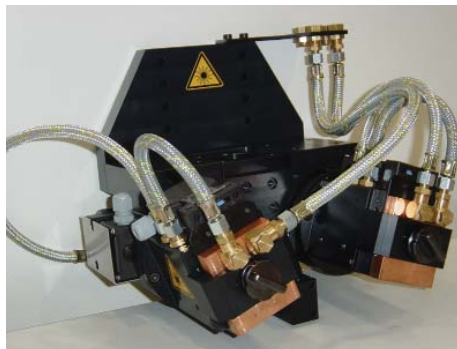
Beam splitter processing head for buildup welding with centric wire feed
